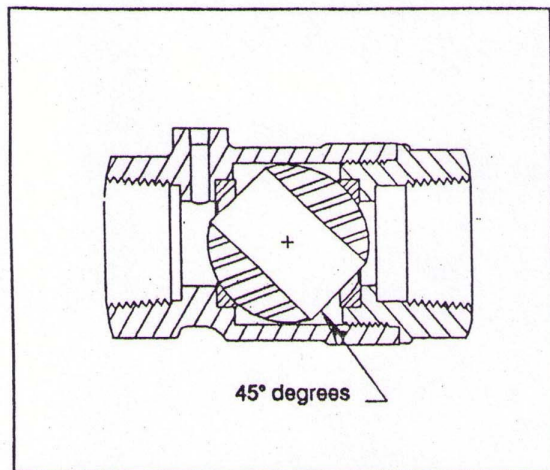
Figure B: Cutaway drawing displaying ball valve in half open, half closed position.
